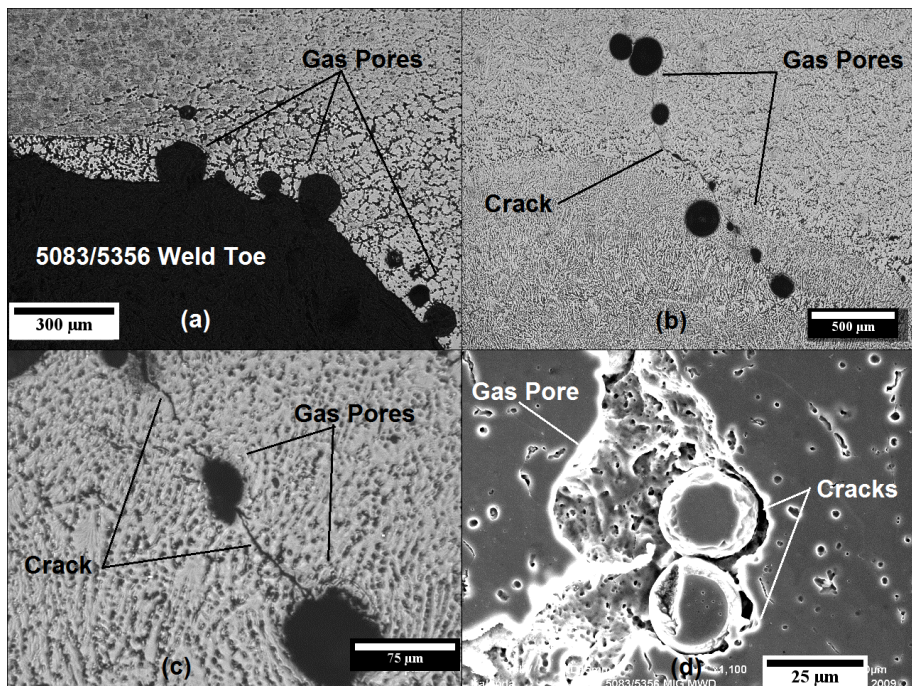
Discontinuities observed in a semi-automatic pulsed gas metal arc weld (5083/ER5356): (a) gas pores, (b)-(d) gas pores and cracks in the weld metal.
